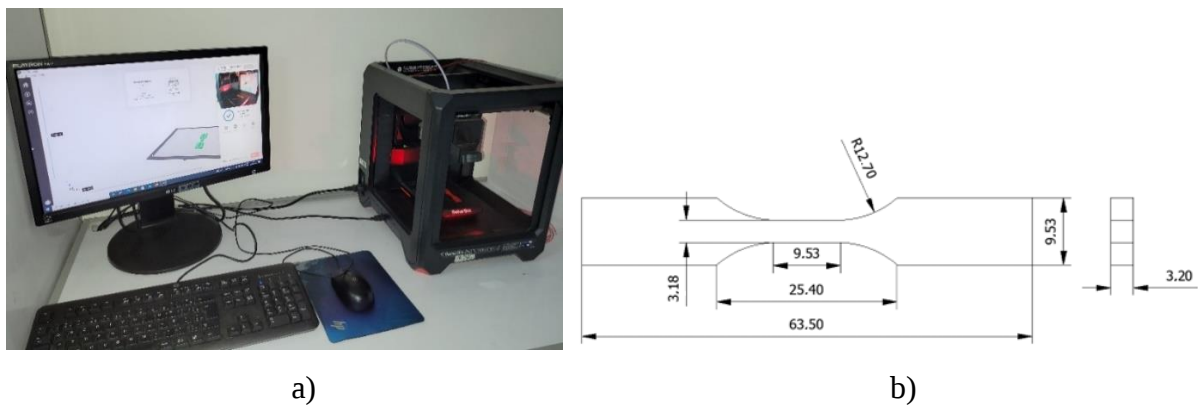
a) 3D printer used to print the test specimens; b) Dimensions of printed specimens in accordance with ASTM D638 [9] (millimeters).
